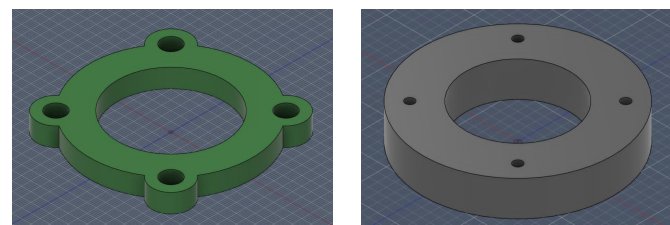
Left: Lens Holder Ring (printed twice); the paired rings clamp the Volk 20D lens by its rim and one carries the four LM5UU linear bearings. Right: Eye Cup Stabilizer, which anchors the distal rod ends and mounts the rubber eye cup.
